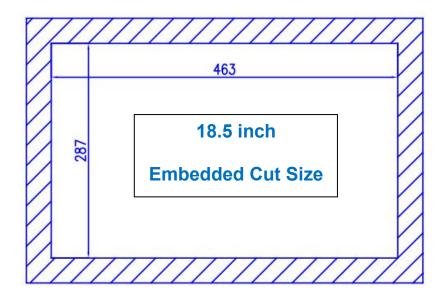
TPC6000-C1854-L Embedded Cut Size
